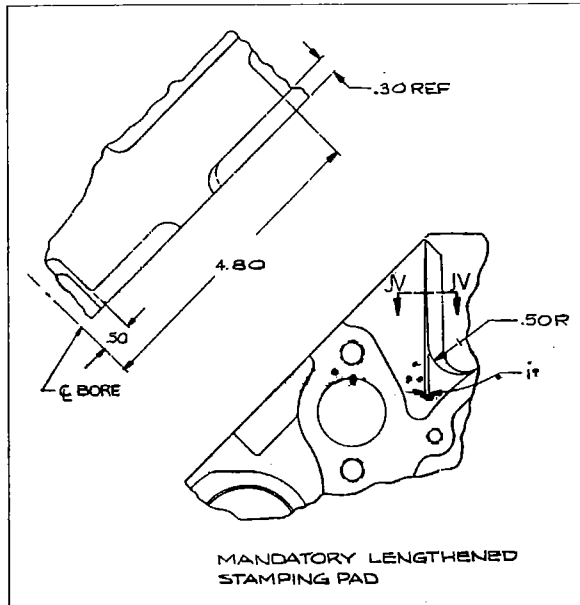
Blueprint of block #3932386 shows mandatory lengthened stamping pad diagram.
